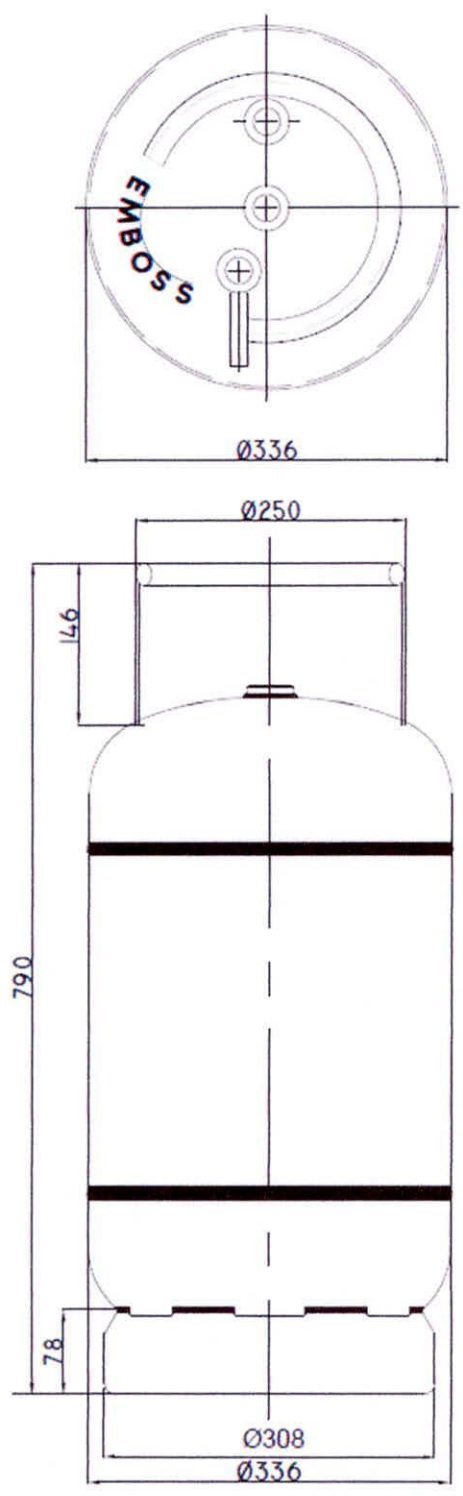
22.0 kg 336.5 mm diameter assembly details
